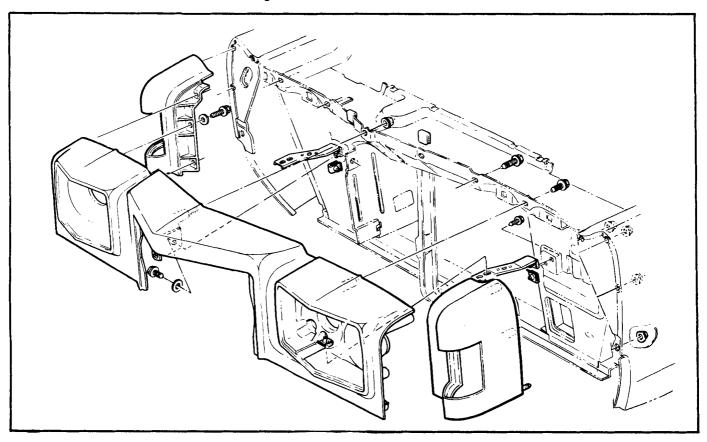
B Series Headlamp Filler Panel and Front Fender Extensions
